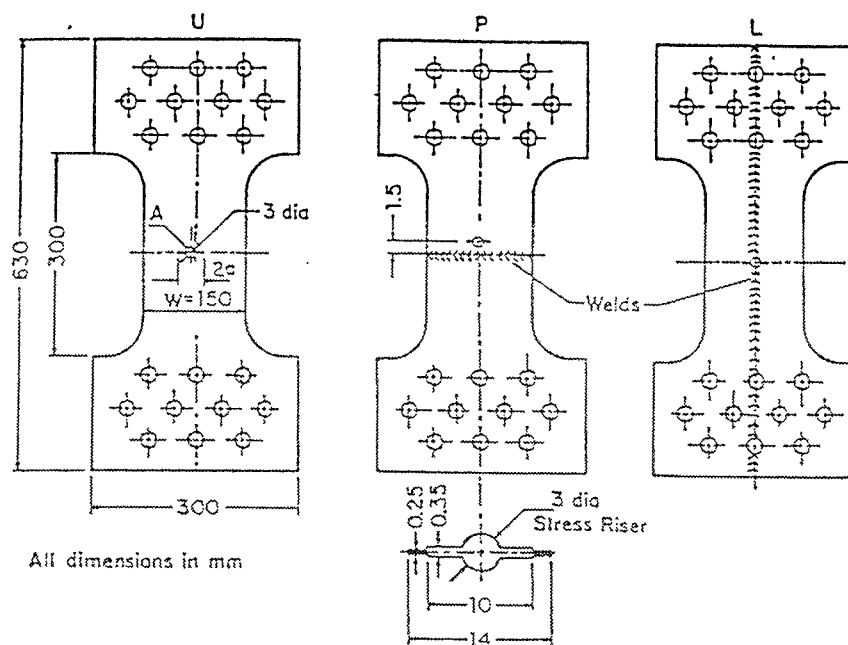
Welded Center Cracked Test specimens (WCCT).
